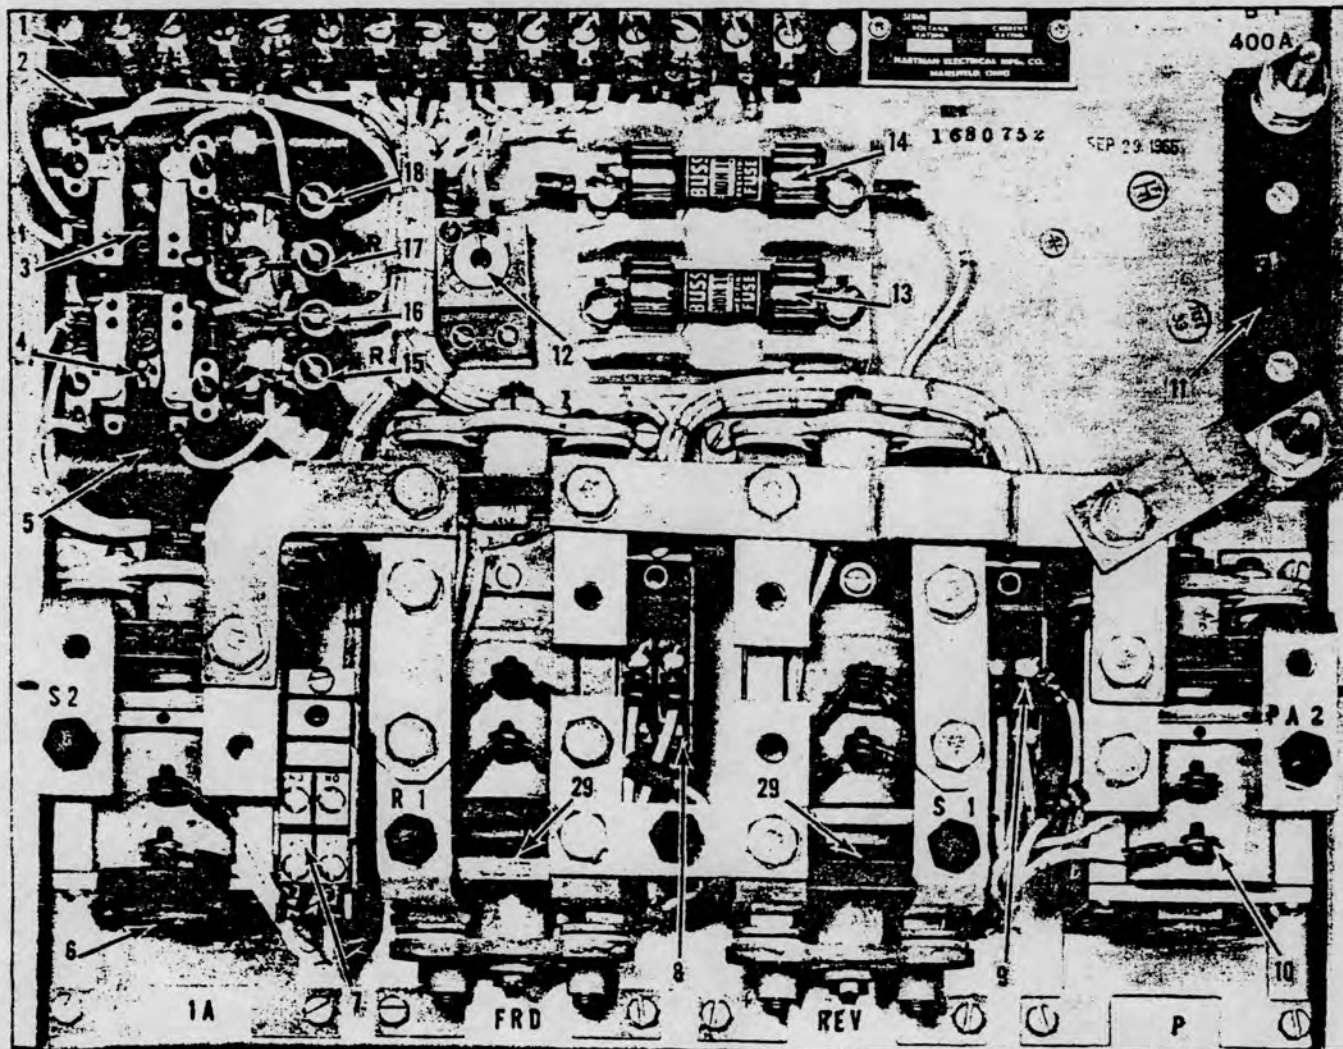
Hartman (Control) Contactor Panel (Machines so Equipped)
